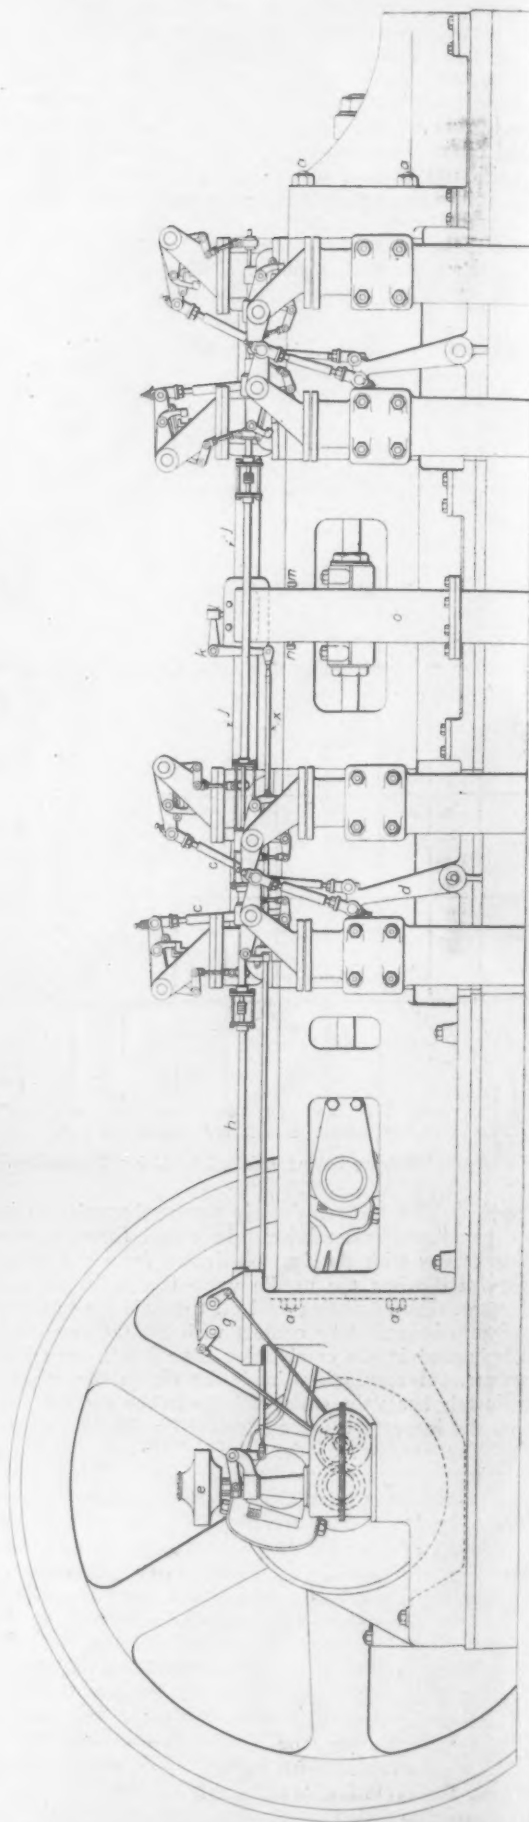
Details of the Application of the Gear to a Gas Engine.
